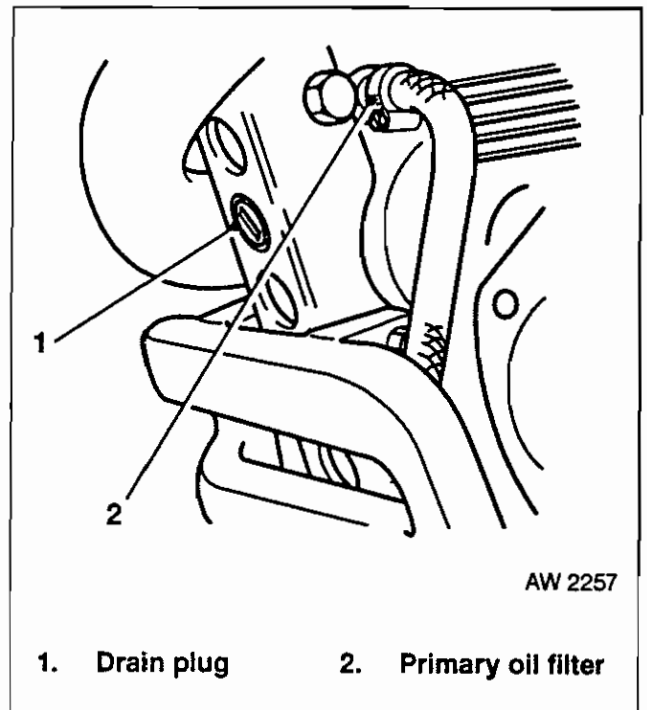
Front Frame Drain Plug and Primary Oil Filter
